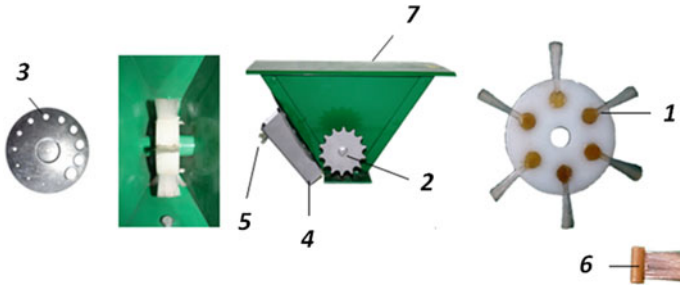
BBA sowing unit design: 1—sowing drum with brushes; 2—driven sprocket; 3—disc; 4—seed drill tube; 5—fixing screw; 6—brush; 7—hopper cover
